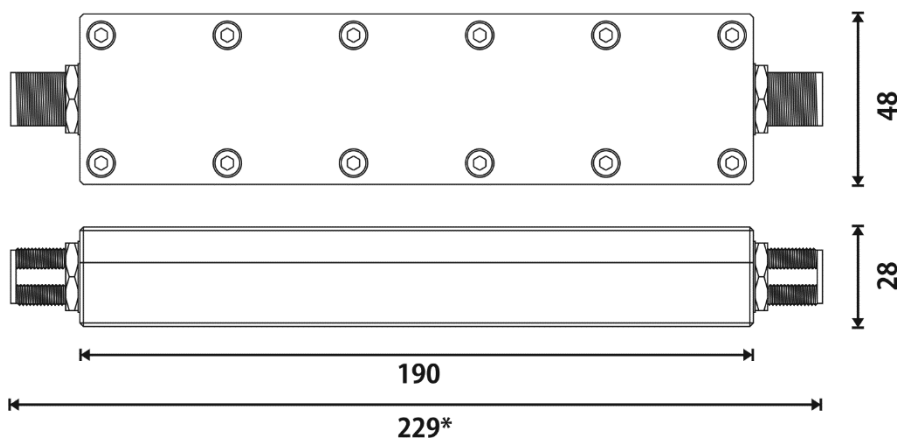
The drawing of PI-5/100 pulse inverter. All the dimensions are in mm.
